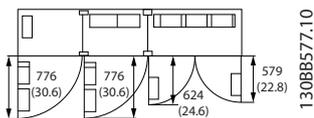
Front Clearance of IP21/IP54 Enclosure Type, Frame Size F13
